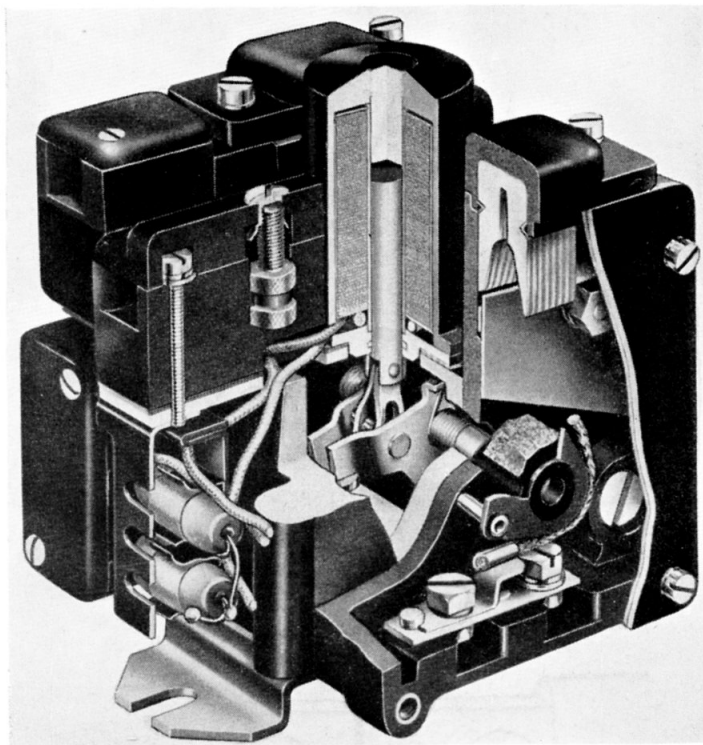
Sectioned view of Type 8A, No. 4 switch
